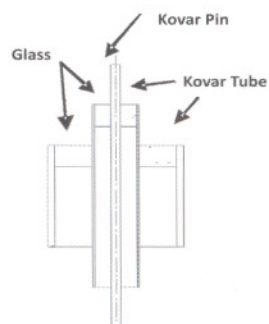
Coaxial glass to metal feed through with mounting flange
